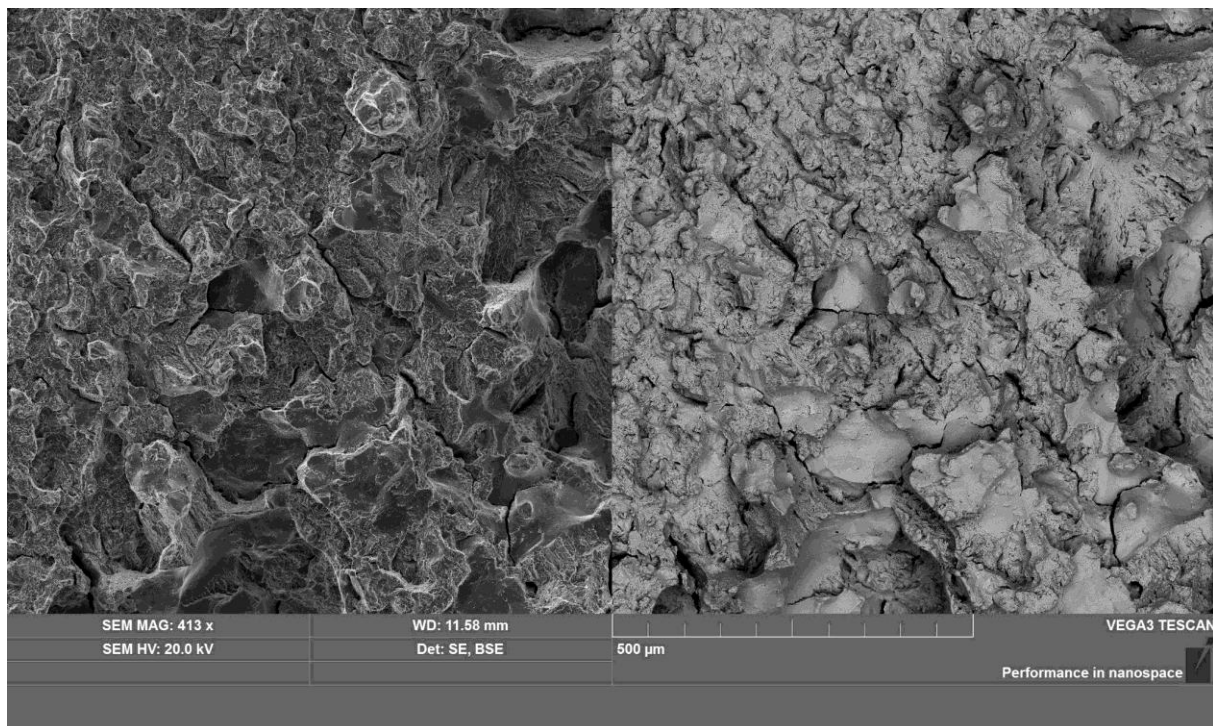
X40CrSiMo 10-2 hydrogen charged samples fracture surface showing some intergranular fracture type.
